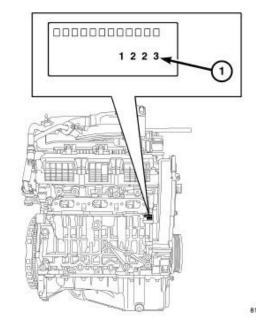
Crankshaft Engine Block Codes Courtesy of CHRYSLER LLC
